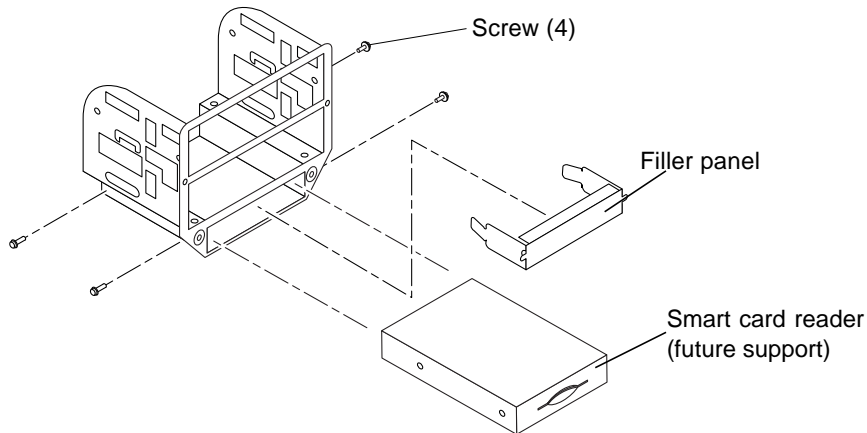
Removing and Replacing the Smart card reader (future support)
